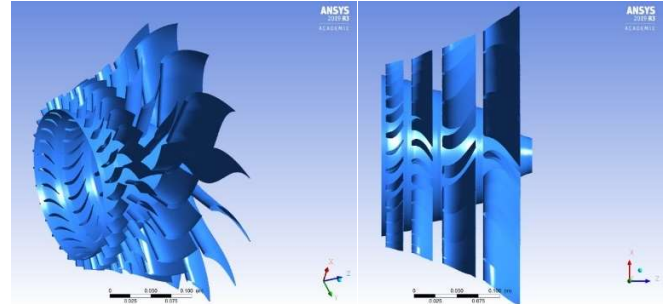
EXPANDER STATOR AND ROTOR GEOMETRIES.
